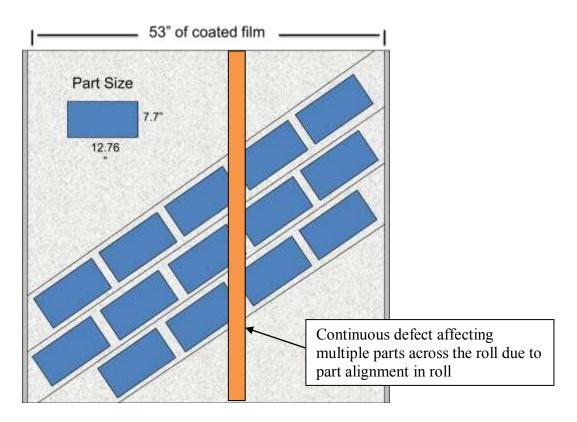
Part size converting visual. This figure demonstrates how final part pieces are cut from a roll.
